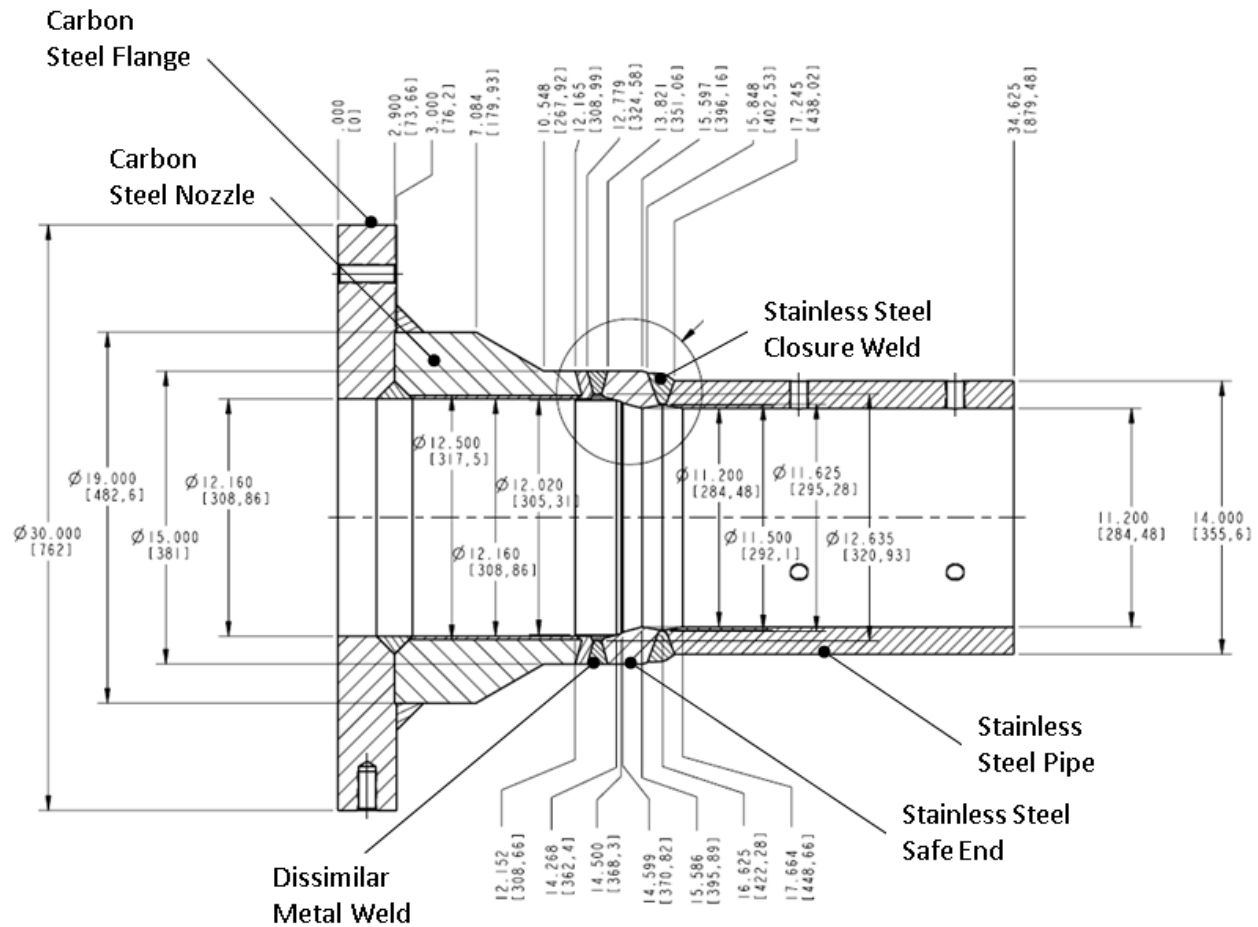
Phase 2b Mock-Up Geometry (Dimensions in in. [mm])
